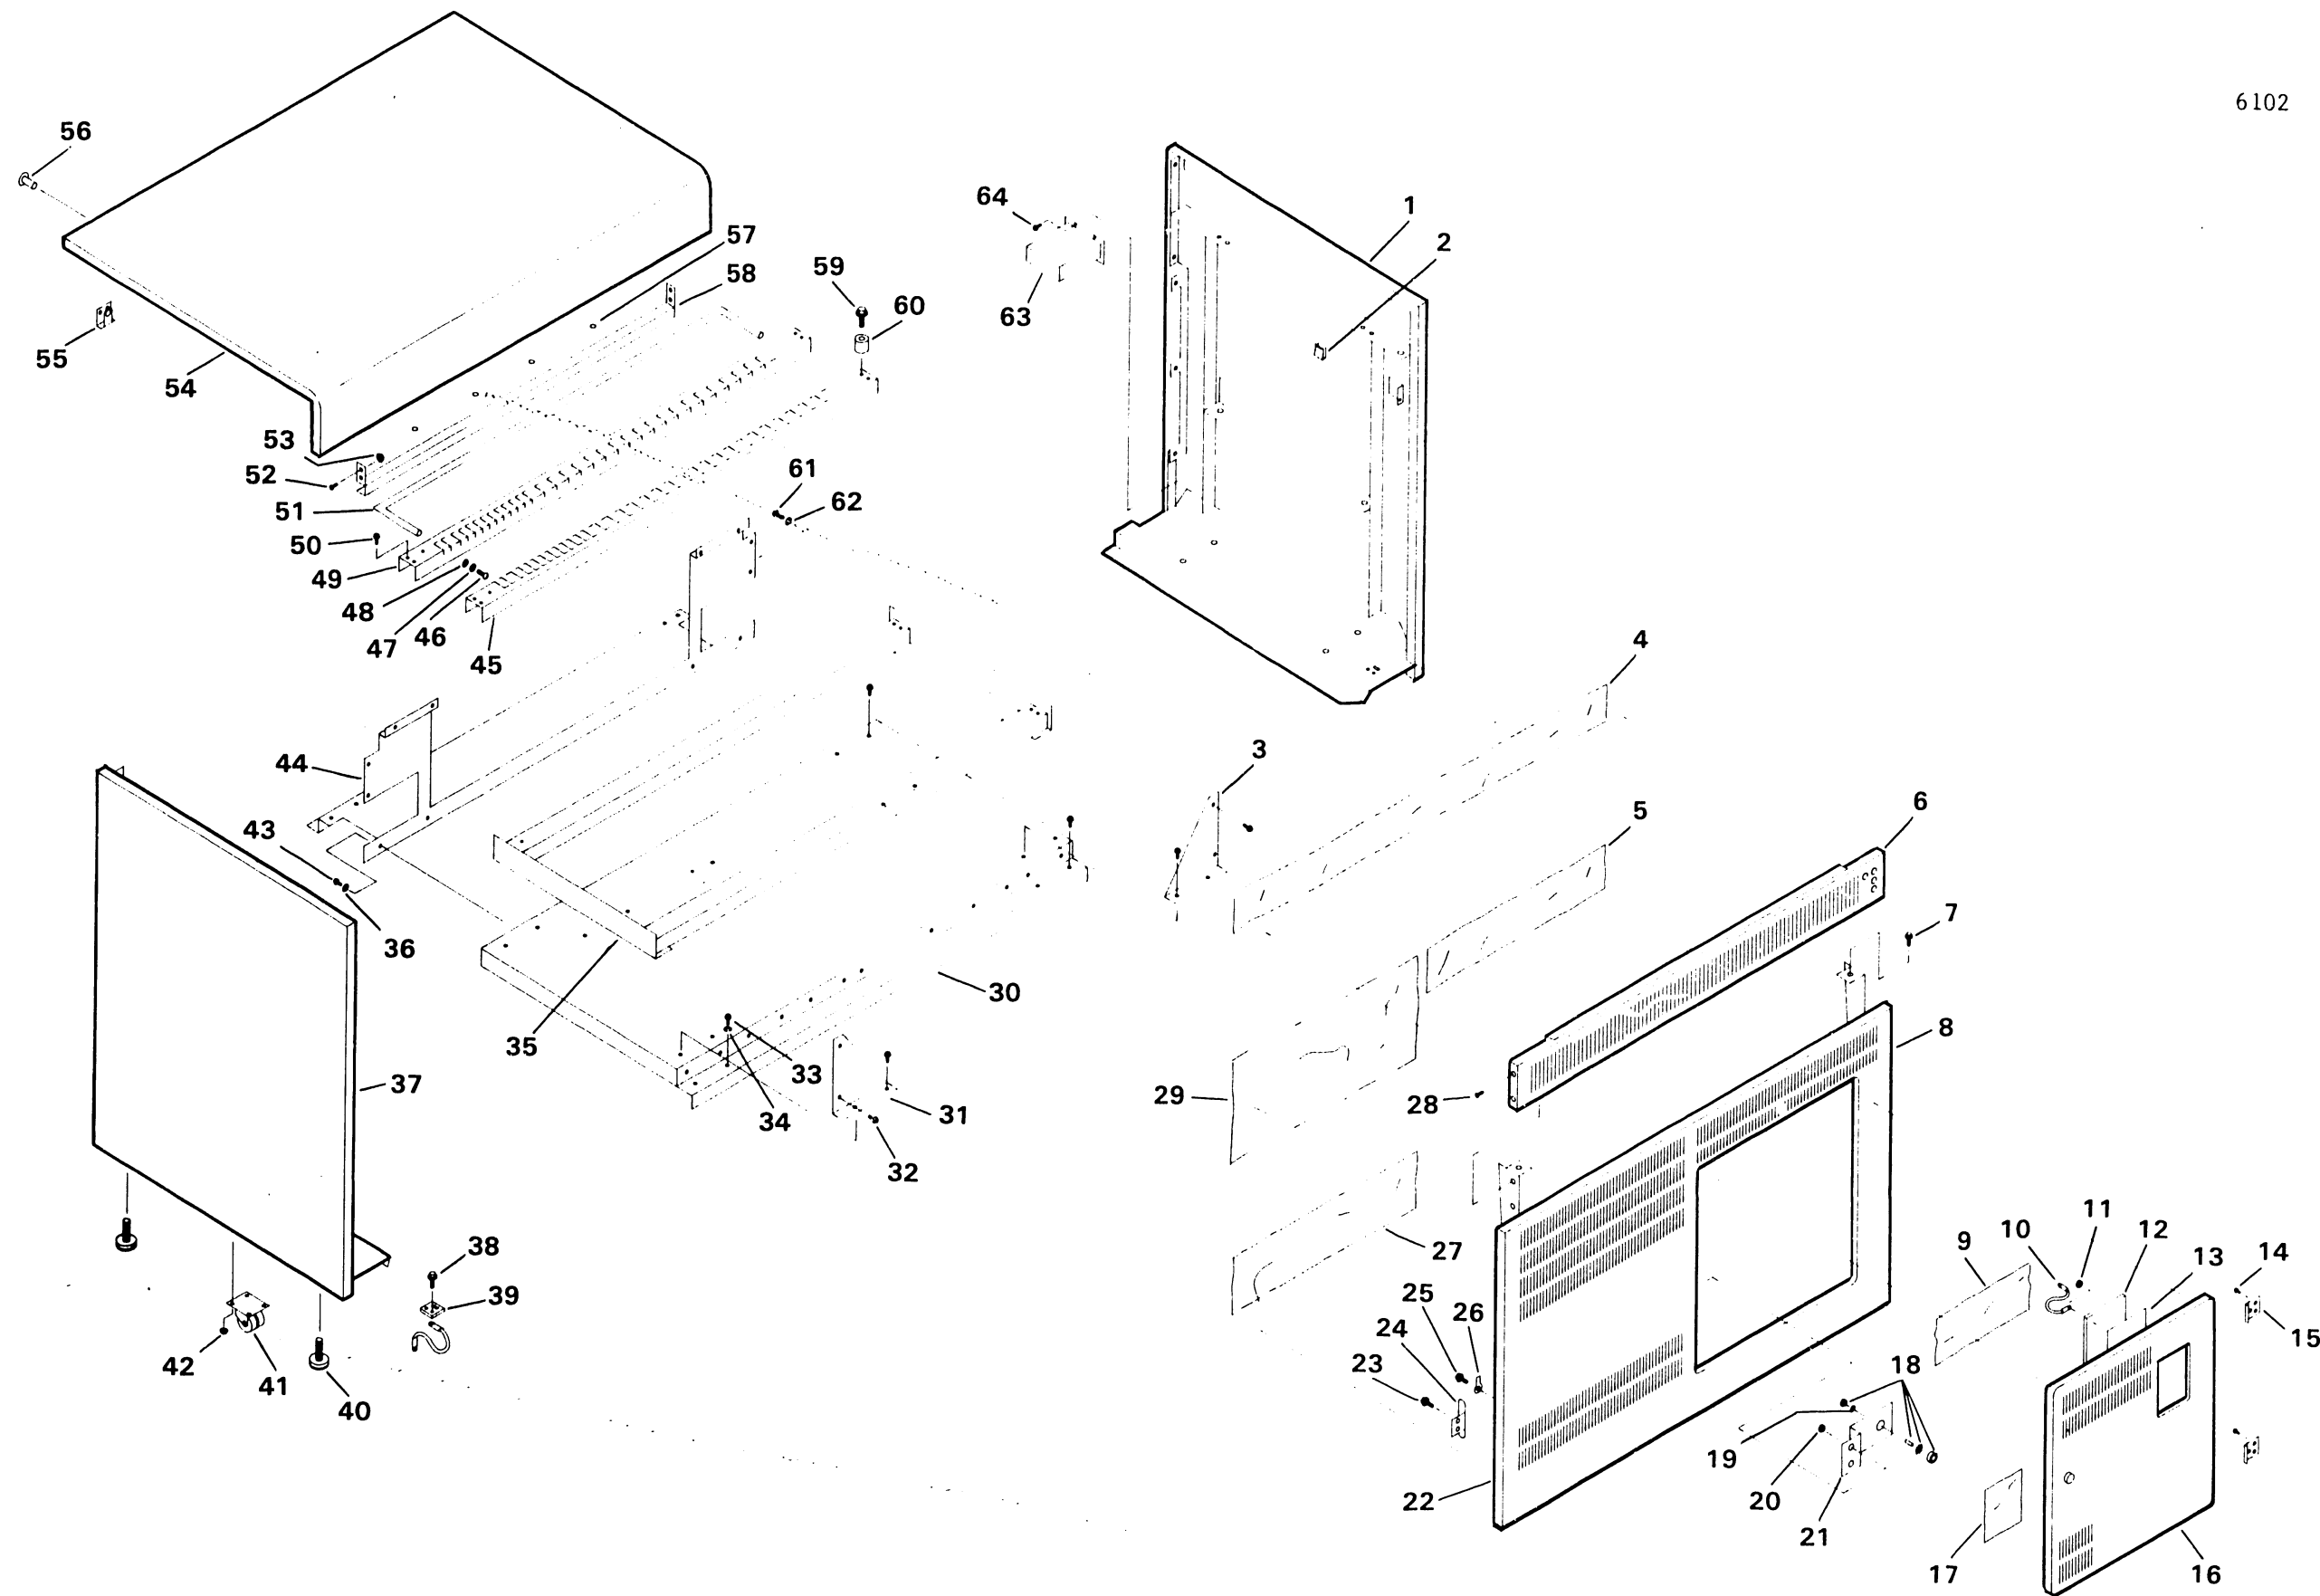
CABINET ASSEMBLY (ASSEMBLY PART NO. 279-4125)
